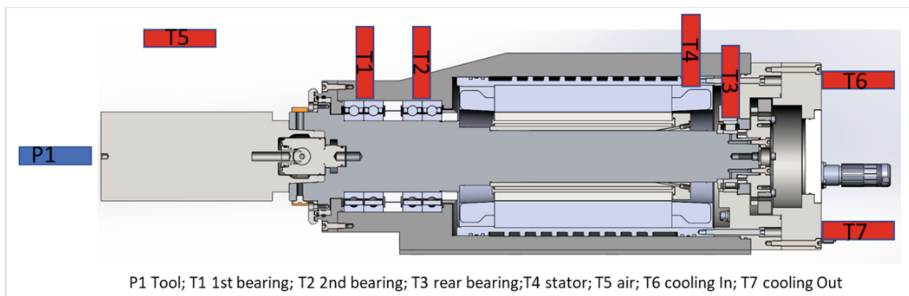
Test scheme of the motor spindle SPL2782.1
